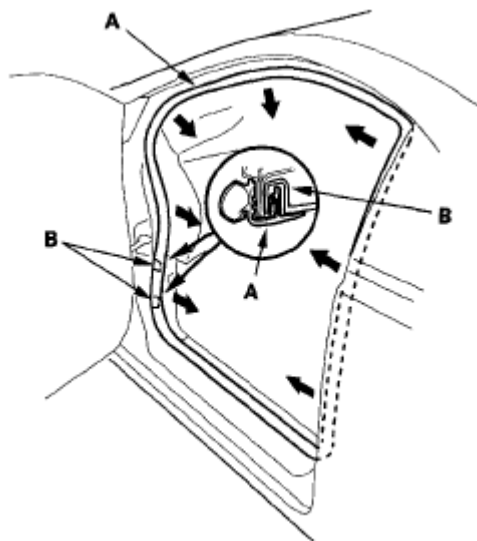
Identifying Door Opening Seal From Trim Hooks
